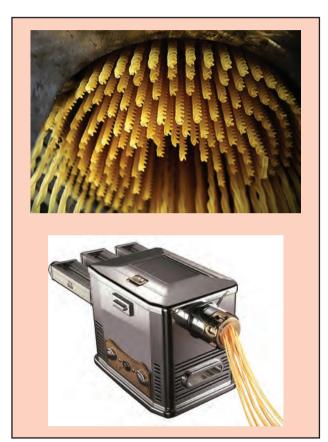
Pasta making machine (Extrusion of Pasta)
